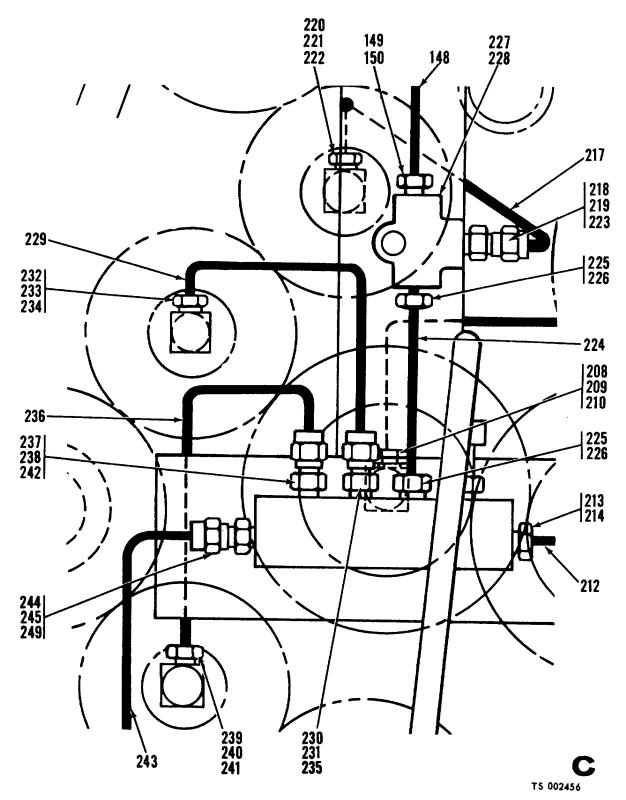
Offset unit oil line assembly. (Sheet 5 of 5)
